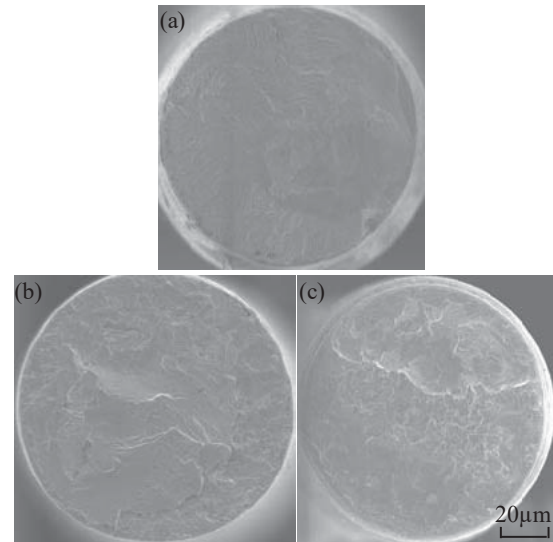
SEM photographs showing fracture surfaces of the directing welded for: (a) J1, (b) J4 and (c) J6.
